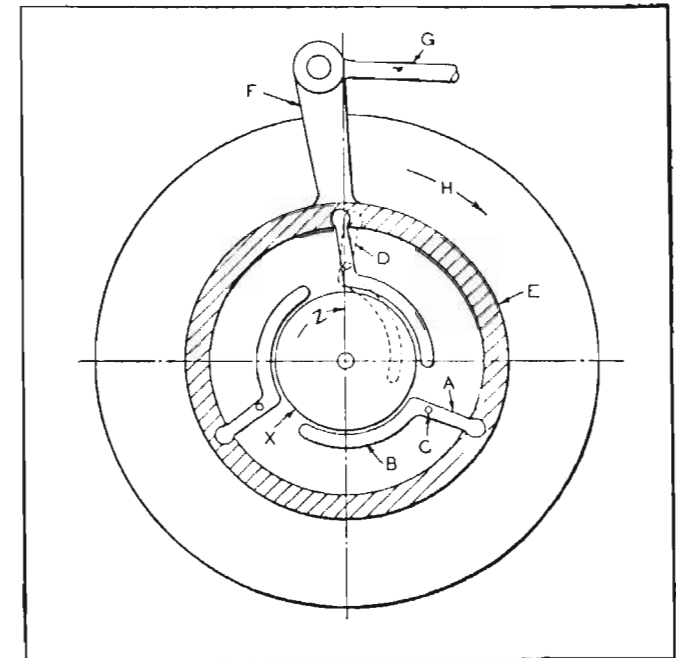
Mechanism for Closing Arc-shaped Members *B* around Rotating Cylinder *X*.
